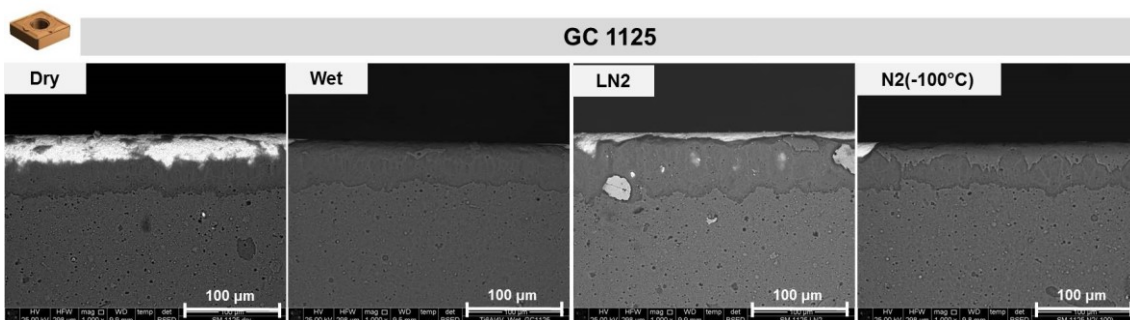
Tool flank wear after 15 minutes of turning under dry, LN₂ and cooled gaseous N₂ conditions. Different considerations pertain to the inserts with a double coating (GC 1125 and GC 1115), in which the second deposited coating is composed by elements that do not exhibit chemical affinity with the workpiece material, thus minimizing the adhesion process. The overcooling induced by the LN₂ may cause an excessive embrittlement of the material determining high abrasion with just a limitation of the adhesion. This behaviour pertains
